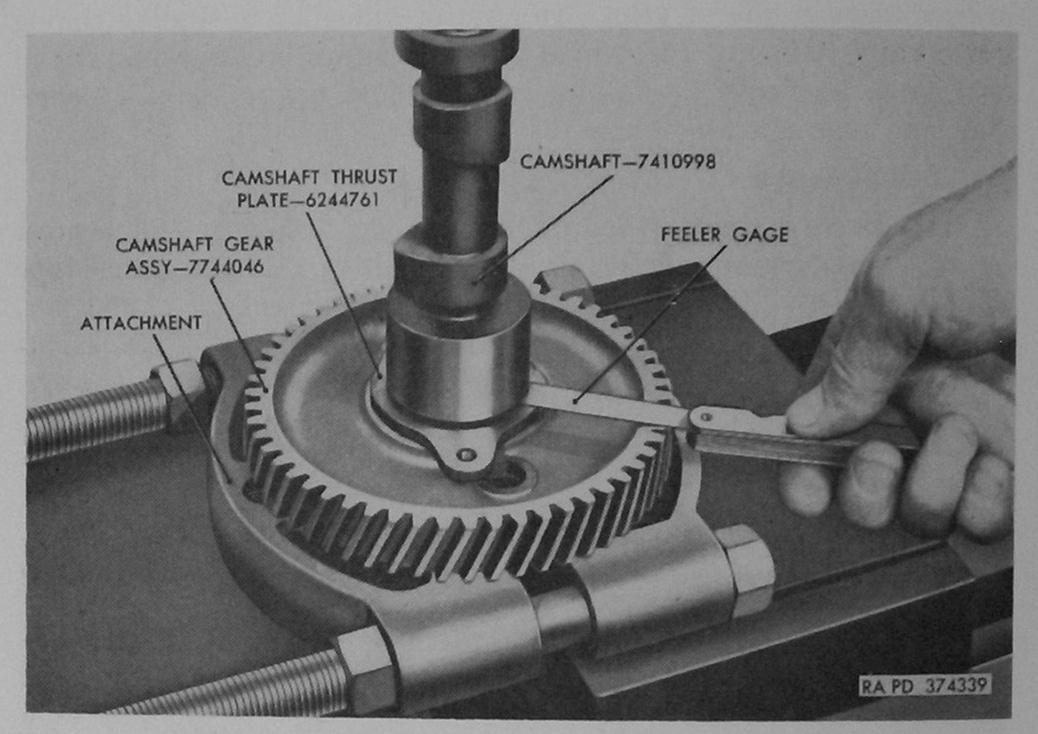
Installing camshaft gear assembly on camshaft—early engine assemblies 7411599 and 8329440.
